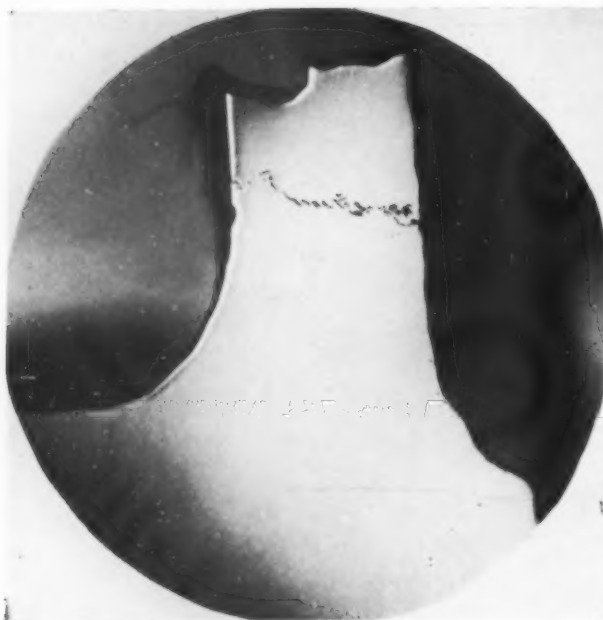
Section through magnesium casting. External examination showed apparent surface crack; subsequent micro-examination reveals chain of internal checks. $\times 8$.
